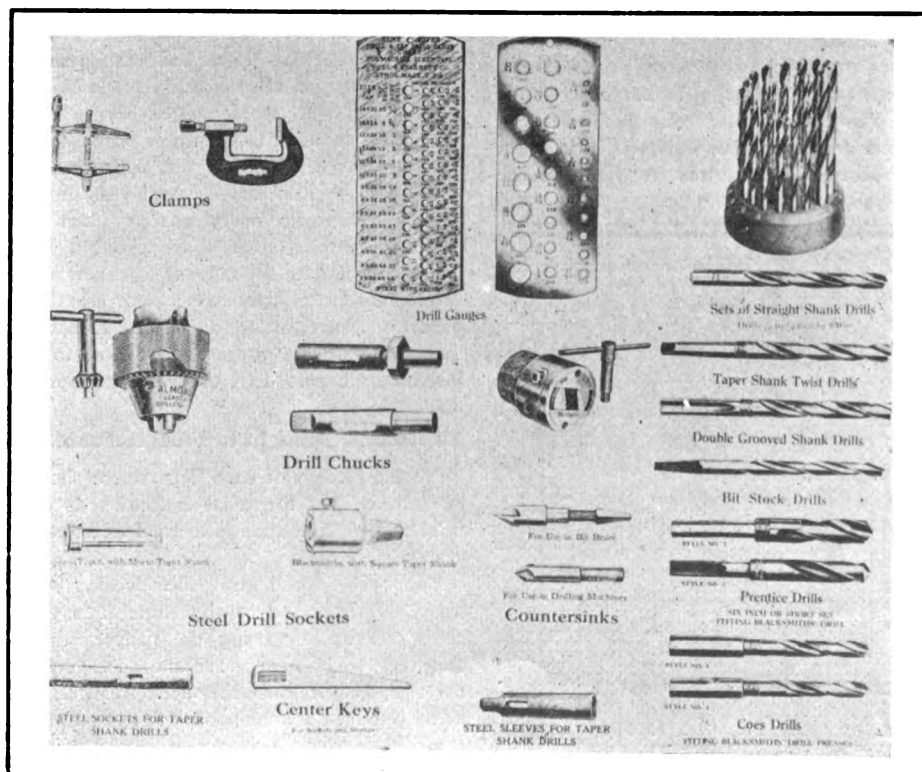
Showing Several Types of Drills and Drill Press Equipment.
